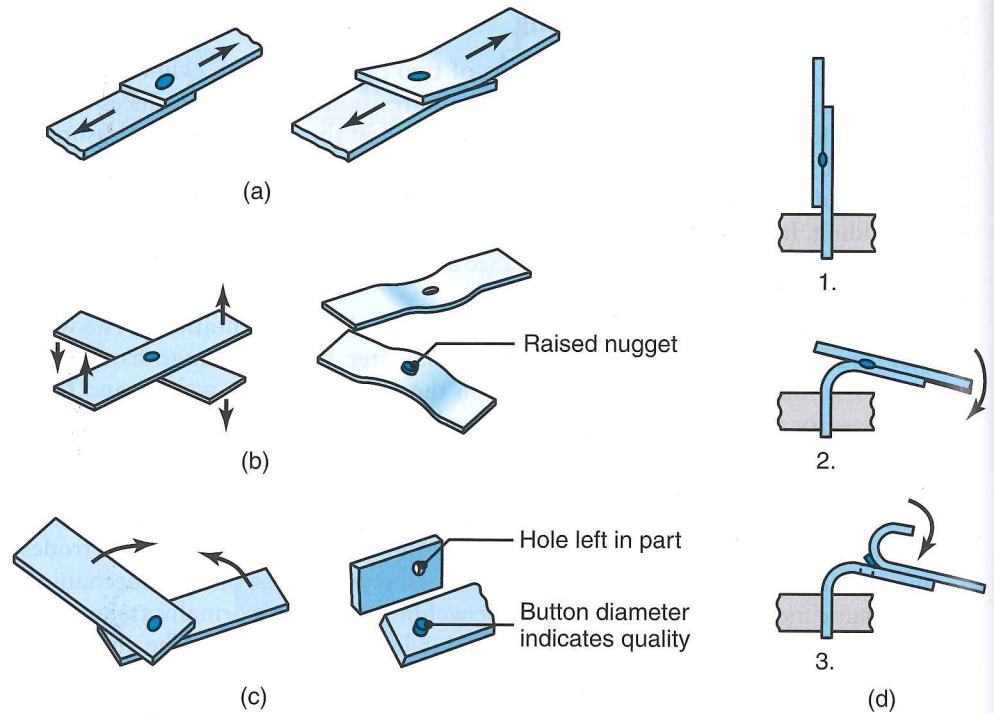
Test methods for spot welds: (a) tension-shear test, (b) cross-tension test, (c) twist test, and (d) peel test (see also Fig. 32.9).
